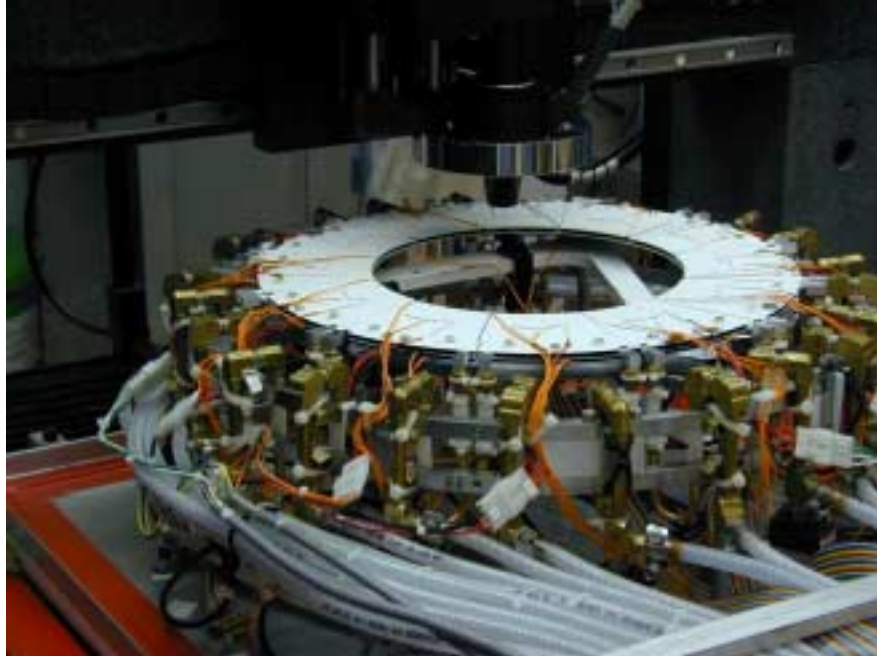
Prototype disk with 12 ESLI sectors in optical CMM. Cover of environmental box has been removed.
